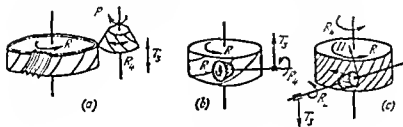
Motion diagrams for various relative positions of the axes of cutter and gear blank rotation.
